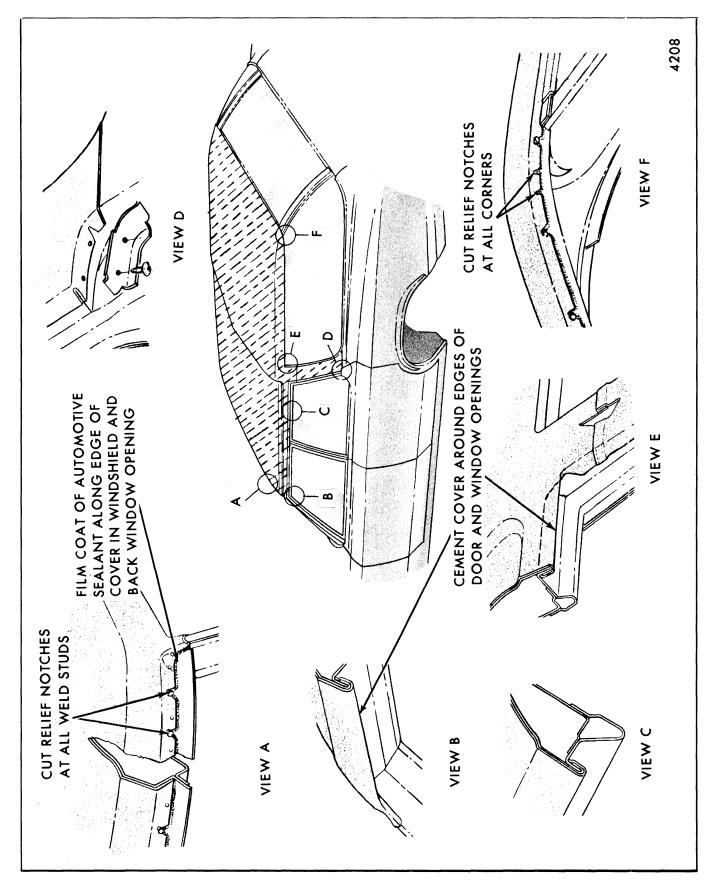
Typical Fabric Roof Cover Installation - Station Wagon Styles
